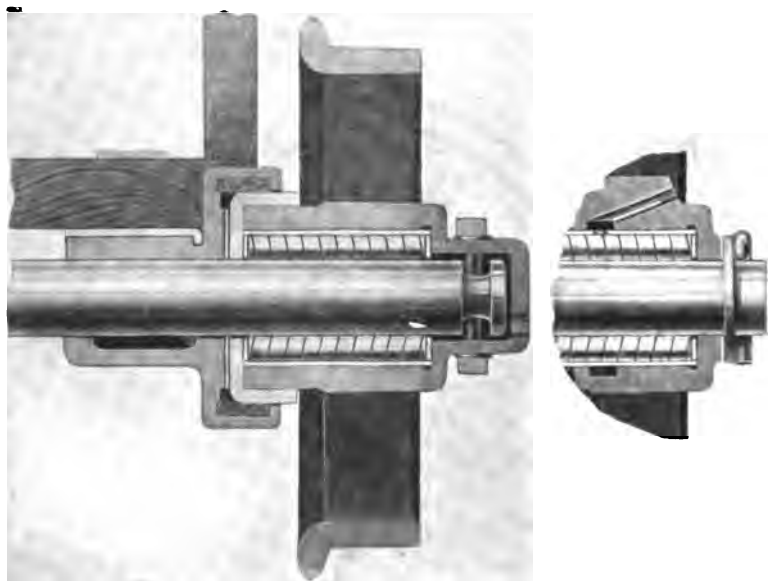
SEC. 10bb.—A wheel made by the American Car & Foundry Co. equipped with the Hyatt Roller Bearing.
